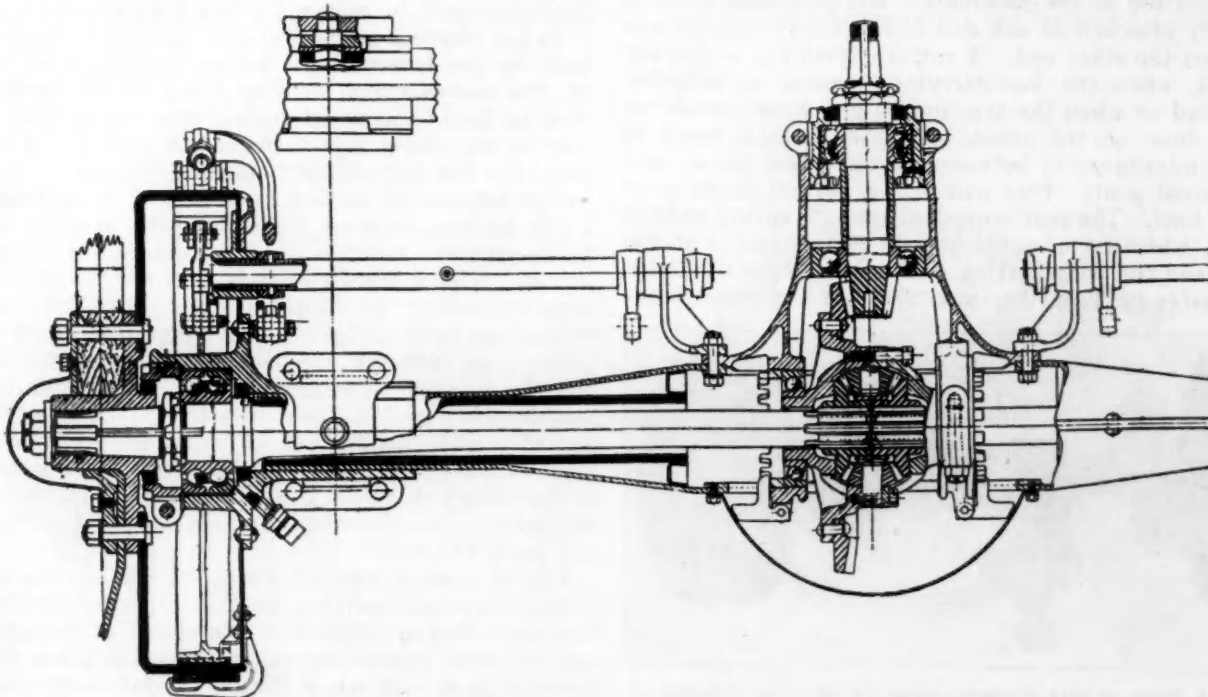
A 1-TON BEVEL-DRIVE AXLE FOR TRUCKS EQUIPPED WITH PNEUMATIC TIRES
